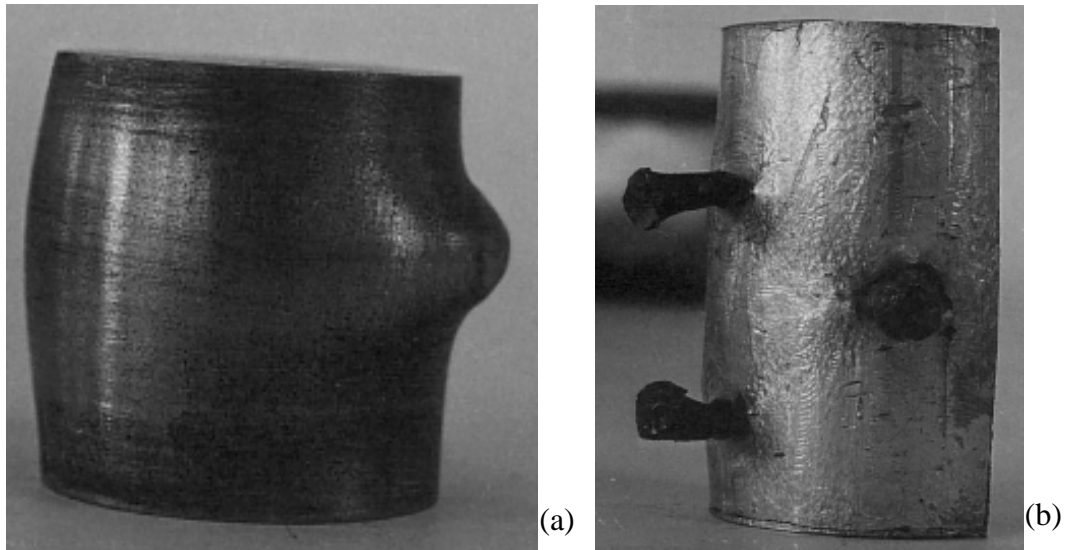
(a) Local heated and free formed workpiece. (b) Local heating of the workpiece is simulated by filling the drilled holes with plasticine [10].
